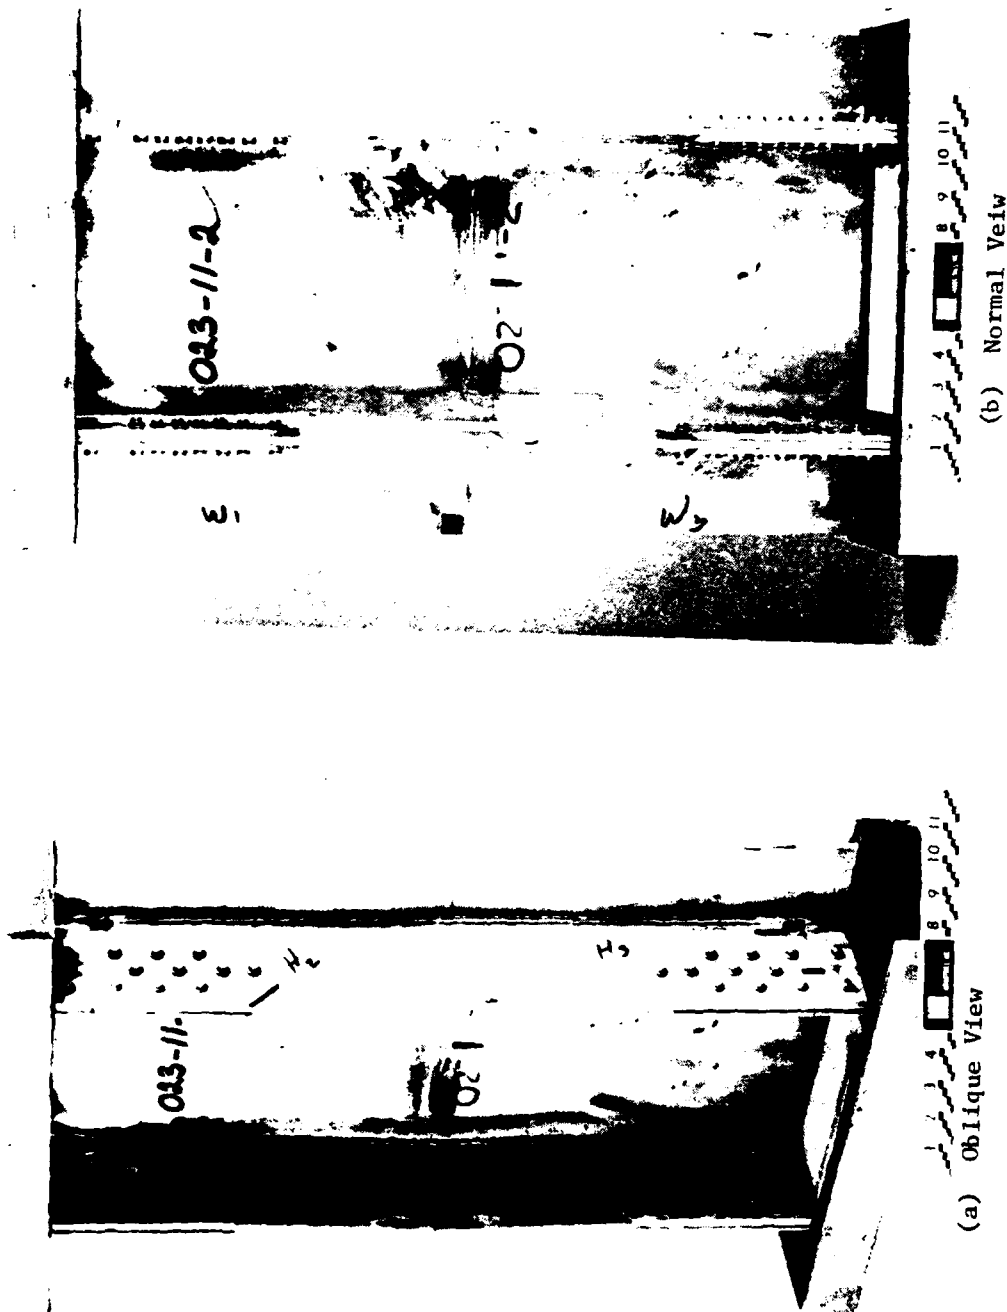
Stiffened Panel Compression Test Specimen No. TT802023-11-2 Failure - Erection Joint Configuration with Riveted Doublers Across Unwelded Stiffener Joints.
